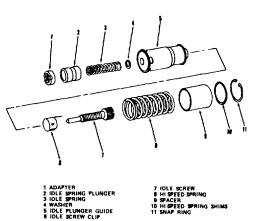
G-53. Standard Governor in VS Pump (Upper Engine) STANDARD AUTOMOTIVE SPRING PACK 1. Remove snap ring which holds governor spring pack in sleeve with a pair of snap ring pliers.
